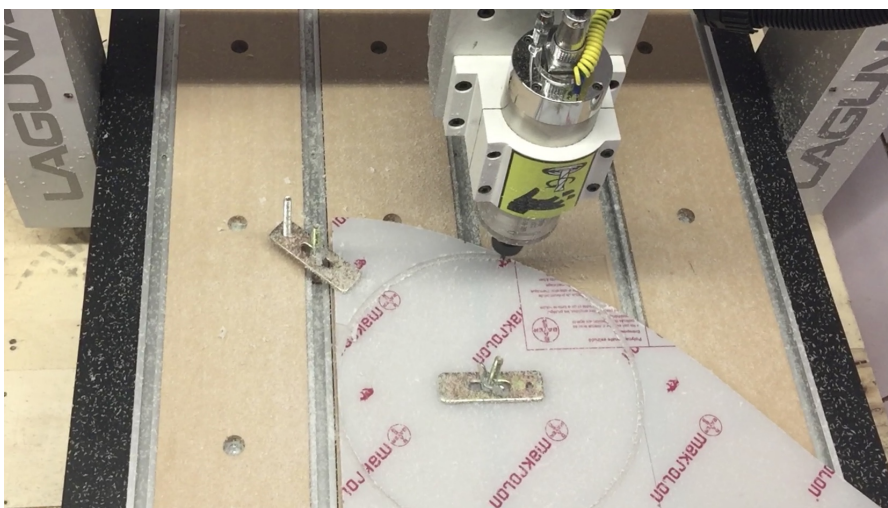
Machining the mounting plate using a Laguna IQ CNC router
